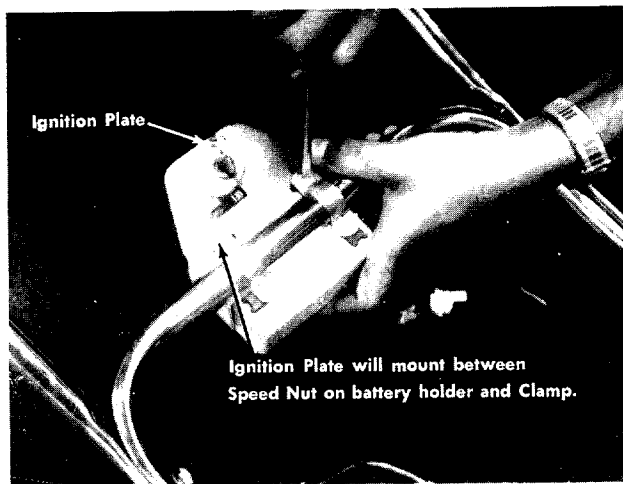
ASSEMBLY OF IGNITION PLATE
